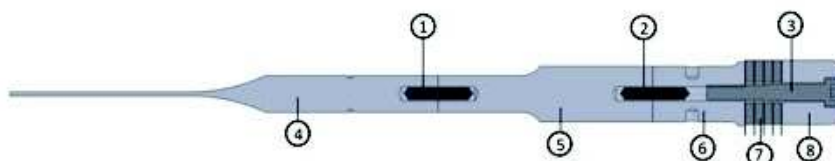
Section view of ultrasonic device: 1) and 2) coupling grub screws; 3) central bolt; 4) sonotrode; 5) booster; 6) front mass; 7) PZT stack; 8) back mass.
